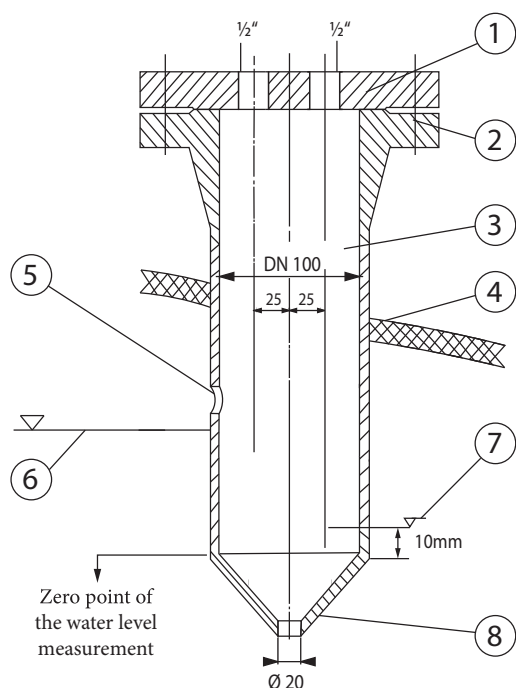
Installation example 1, usage with protection tube inside the boiler.
